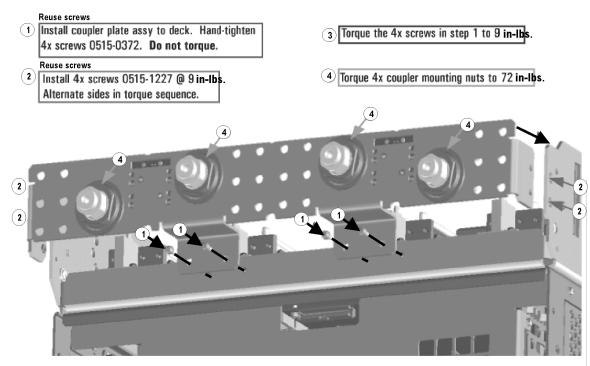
LED Board Assemblies and Test Port Coupler Assemblies Installation(N5240-60058, N5224-00005, 0515-1521 (x4), 5087-7793, 5022-1087 (x4), N5225-60001 (x2))
